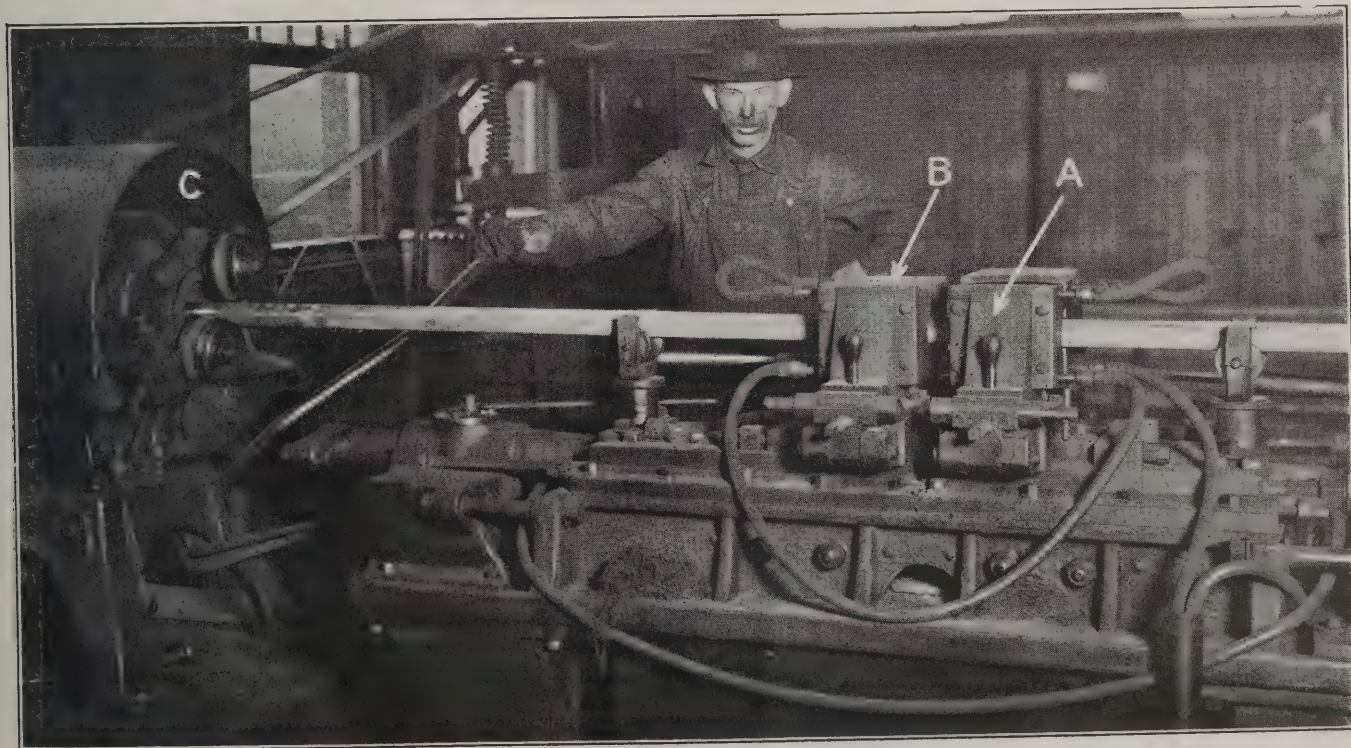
Rolling a Boiler Tube After It Has Been Safe Ended in Thomson Electric Butt Welder
